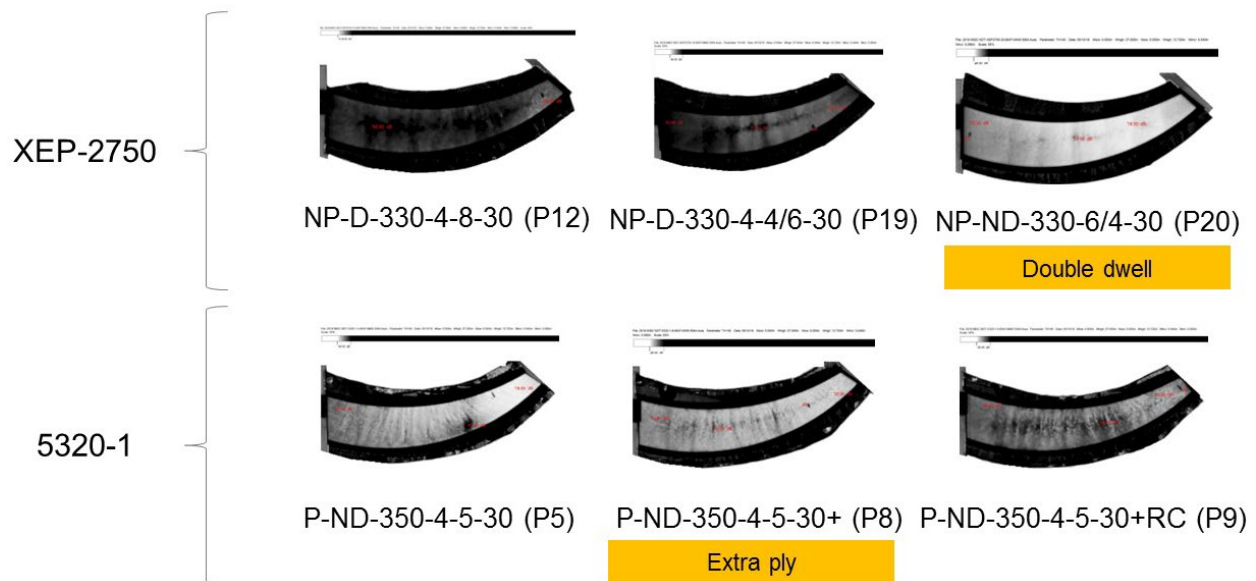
C-channel parts C-scan analysis. Initial manufacturing trials parts manufactured using CYCOM® EP2750 (top) and preconsolidated CYCOM® 5320-1 (bottom).
